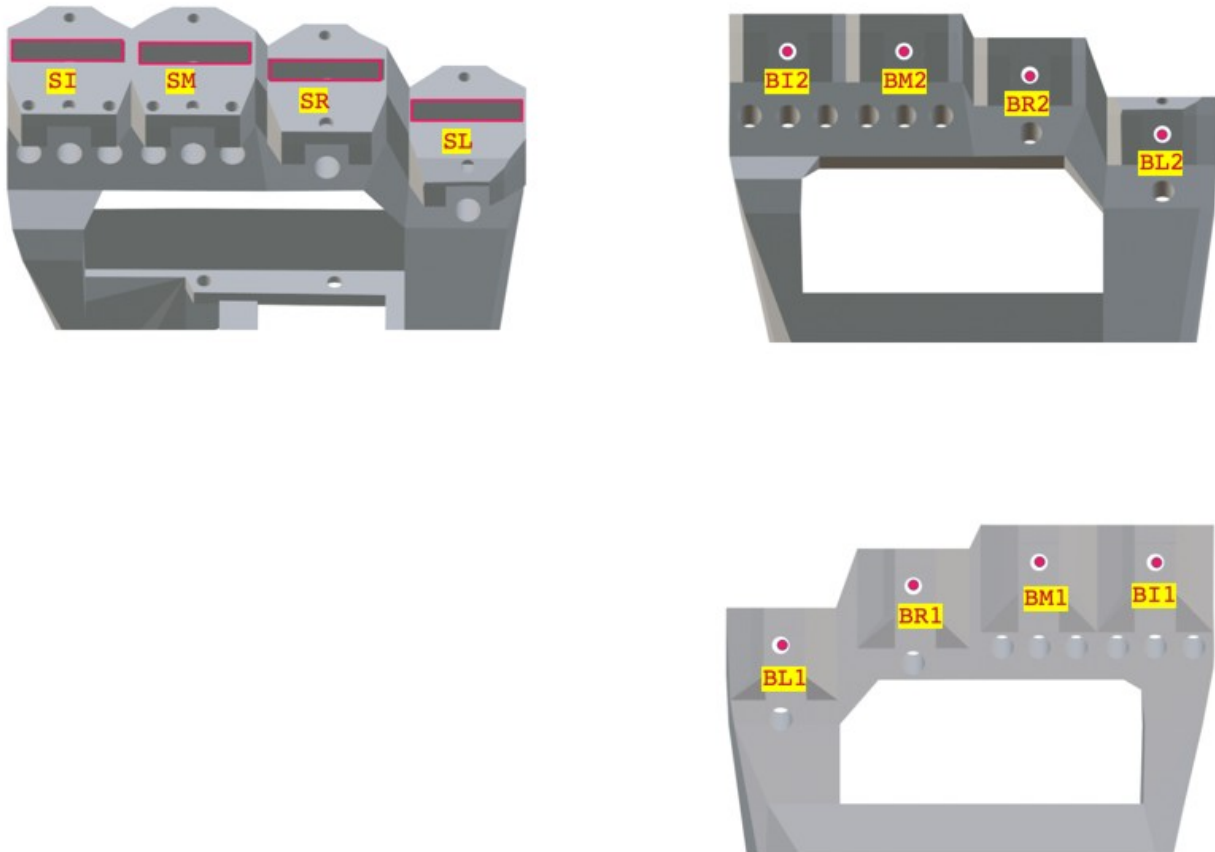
Left hand - skeleton - front view - upper finger holes and slots
